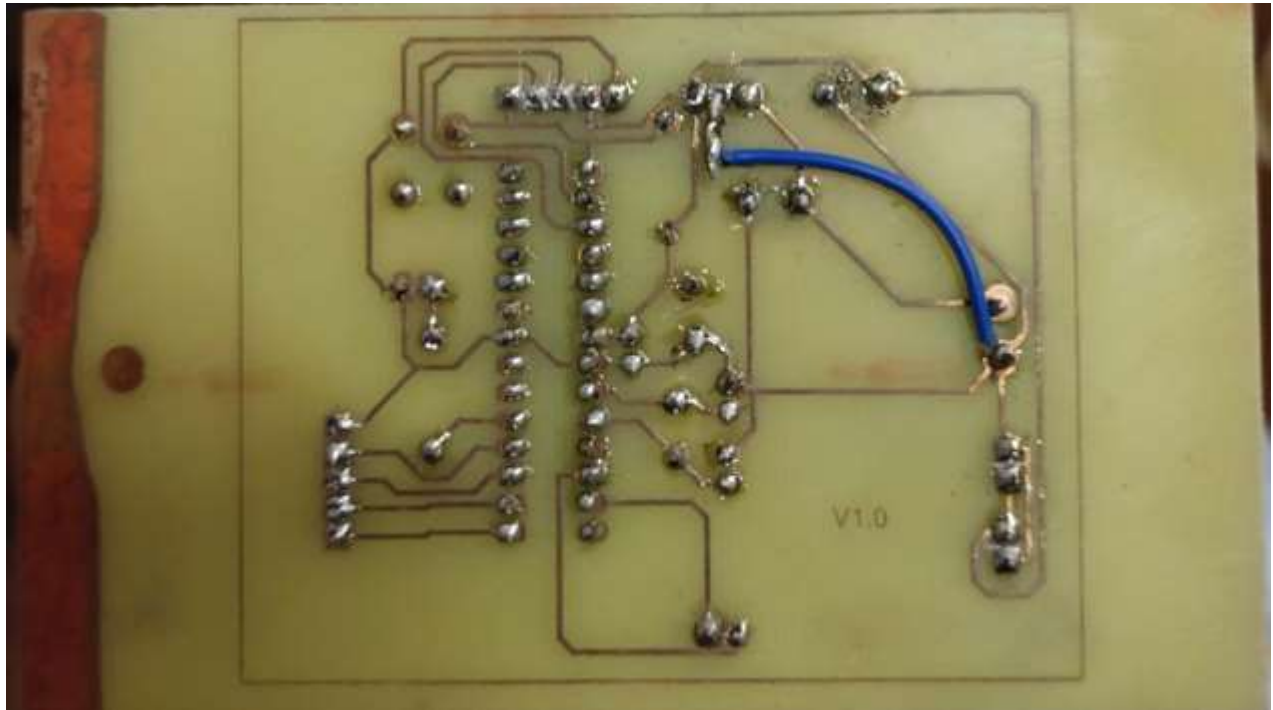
PCB of Motor controller Iteration 1 (After mounting components)
